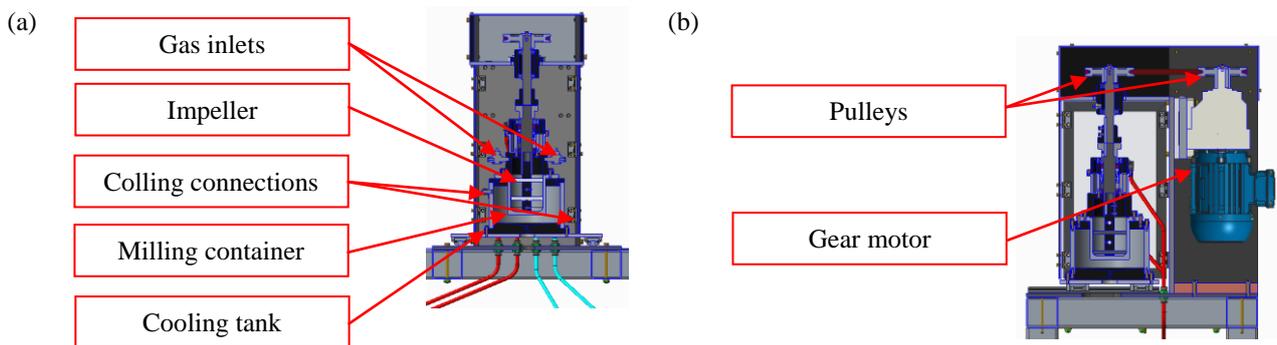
(a) Section view of the milling container, cooling tank and impeller system, (b) Section view of the transmission system
